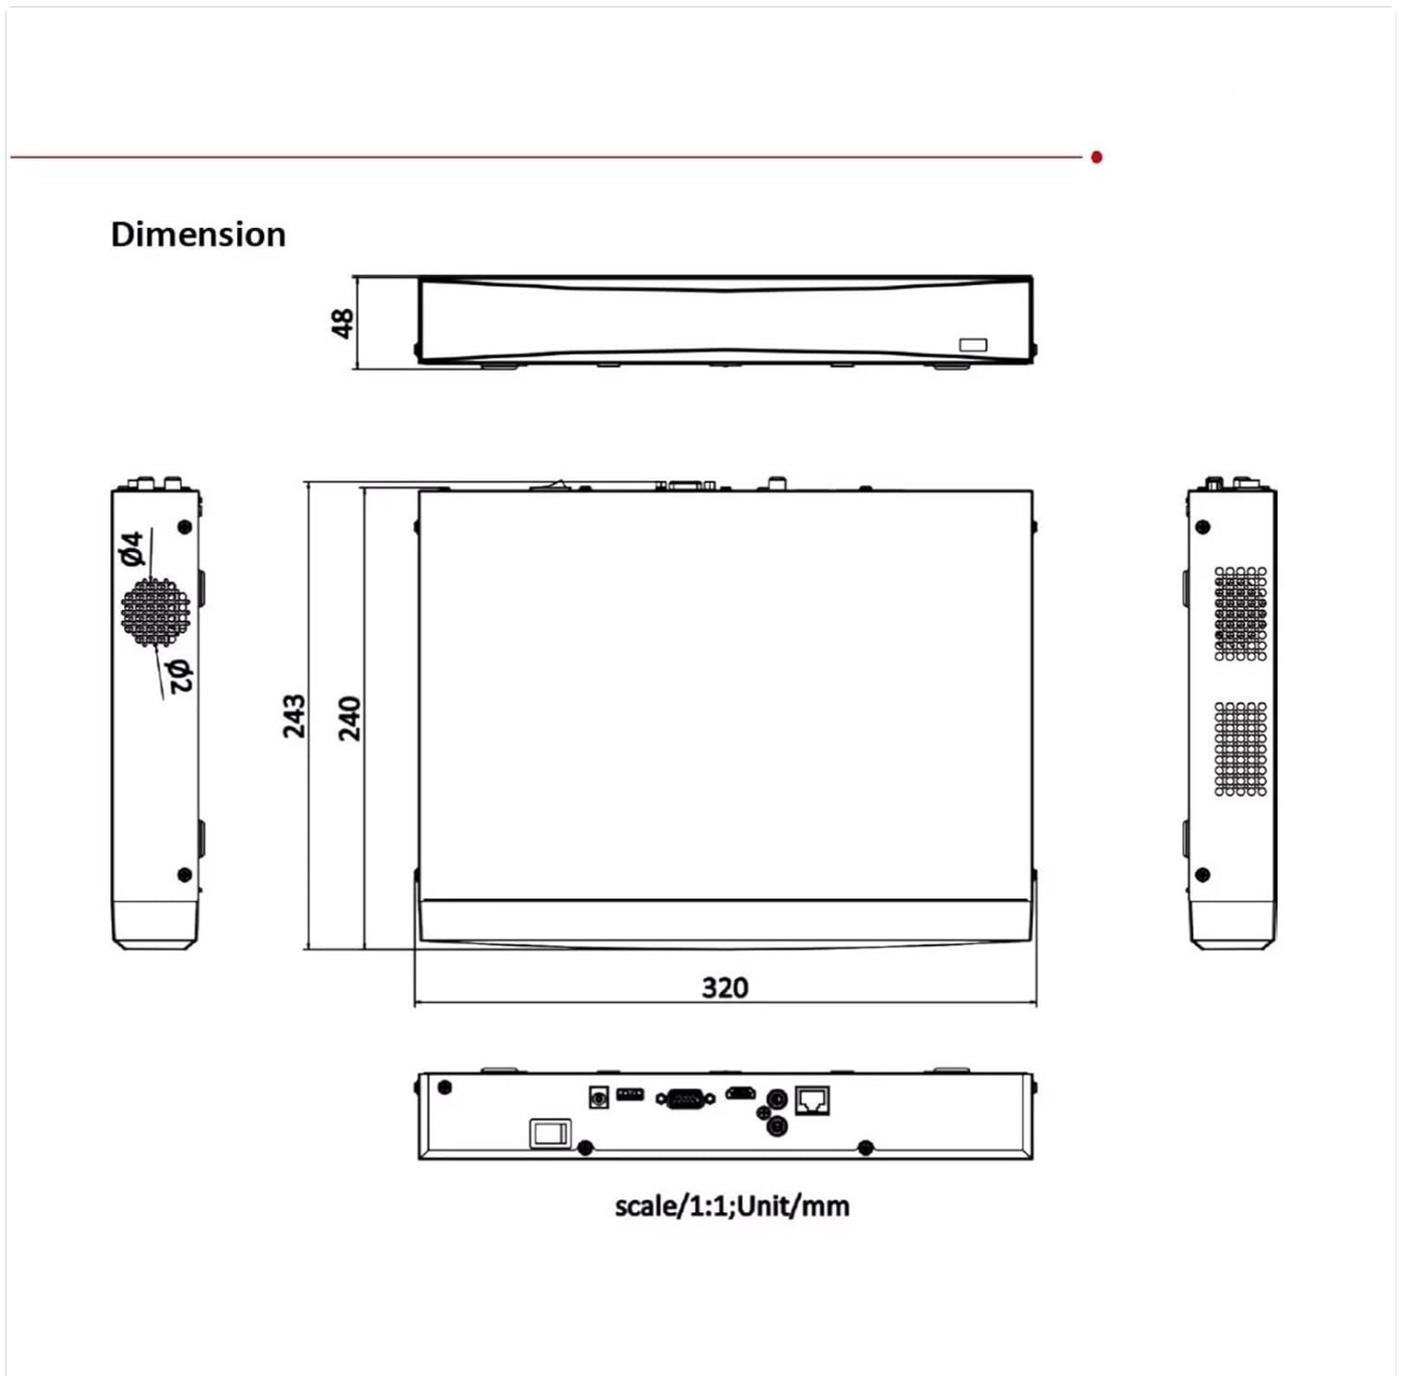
NVR Dimensions. This technical drawing provides precise measurements of the NVR unit in millimeters.
